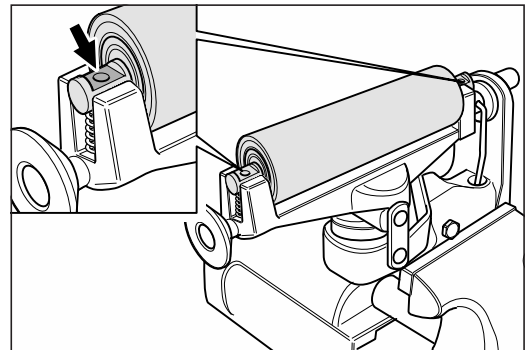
Insert the new tensioning roller, ensuring that the surfaces on the shaft ends are pointing upwards.
